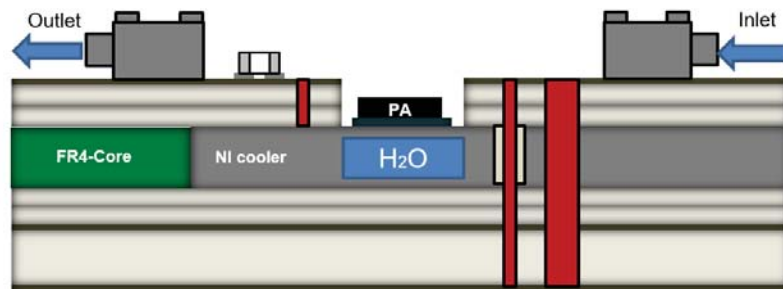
Multilayer PCB with 800 μ m-thick embedded 3D-SLM-printed Ni-cooler
